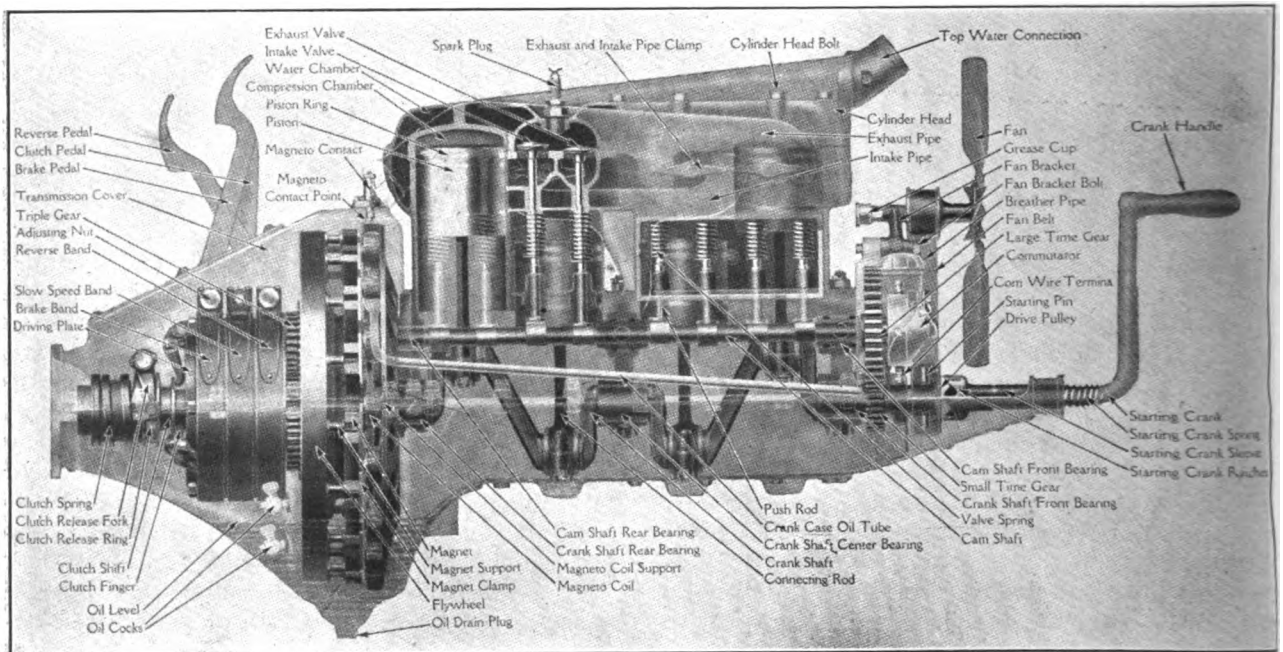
Longitudinal, Phantom View of Model T Ford Motor, Showing the Location and General Arrangement of Its Components.
